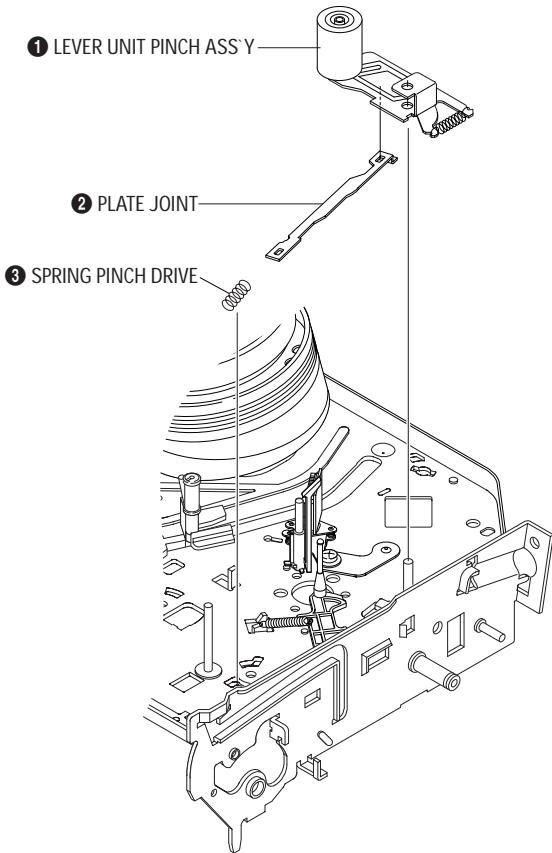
Lever Unit Pinch Ass'y, Plate Joint, Spring Pinch Drive Removal
